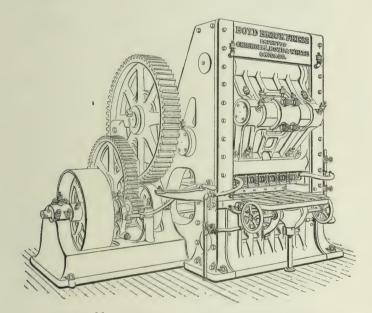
SIX-MOLD DRY-PRESS BRICK MACHINE.
